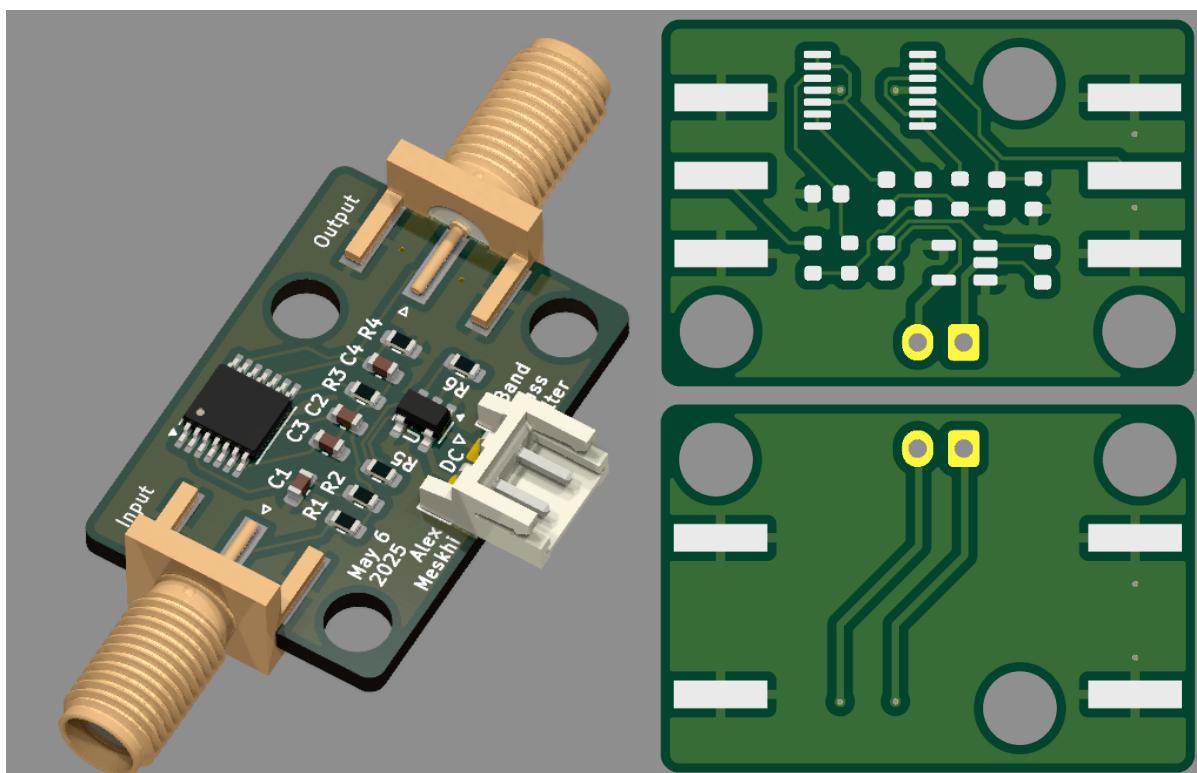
BPF PCB 3D model with the components placed (left) and with the components removed and front silkscreen not visible viewed from front and back (right). [2]
